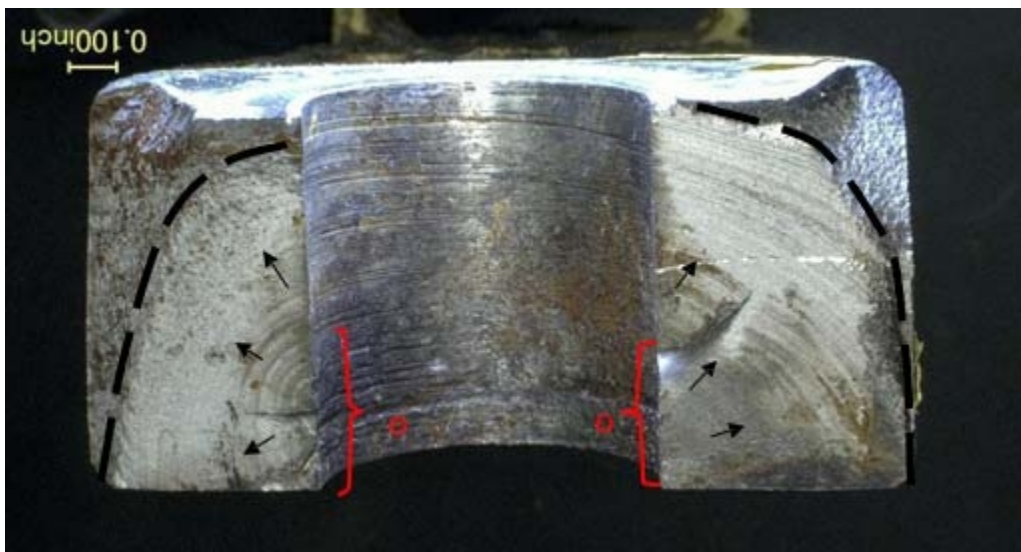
Right outboard wing forward spar, lower fitting, upper arm.
